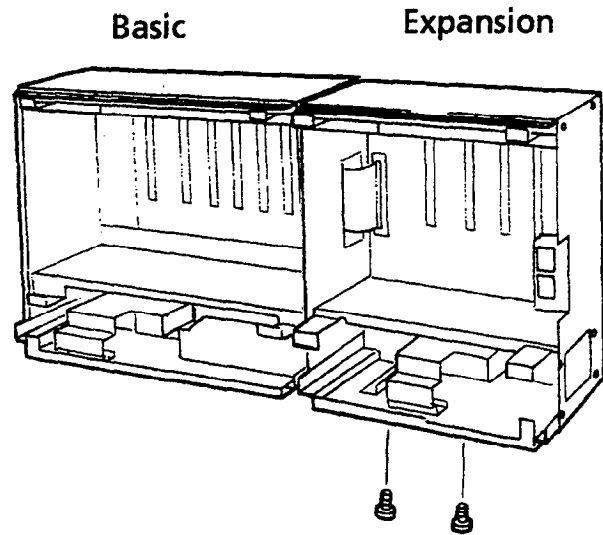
Attaching the Level II Expansion KSU to the Wall Mounting Bracket
